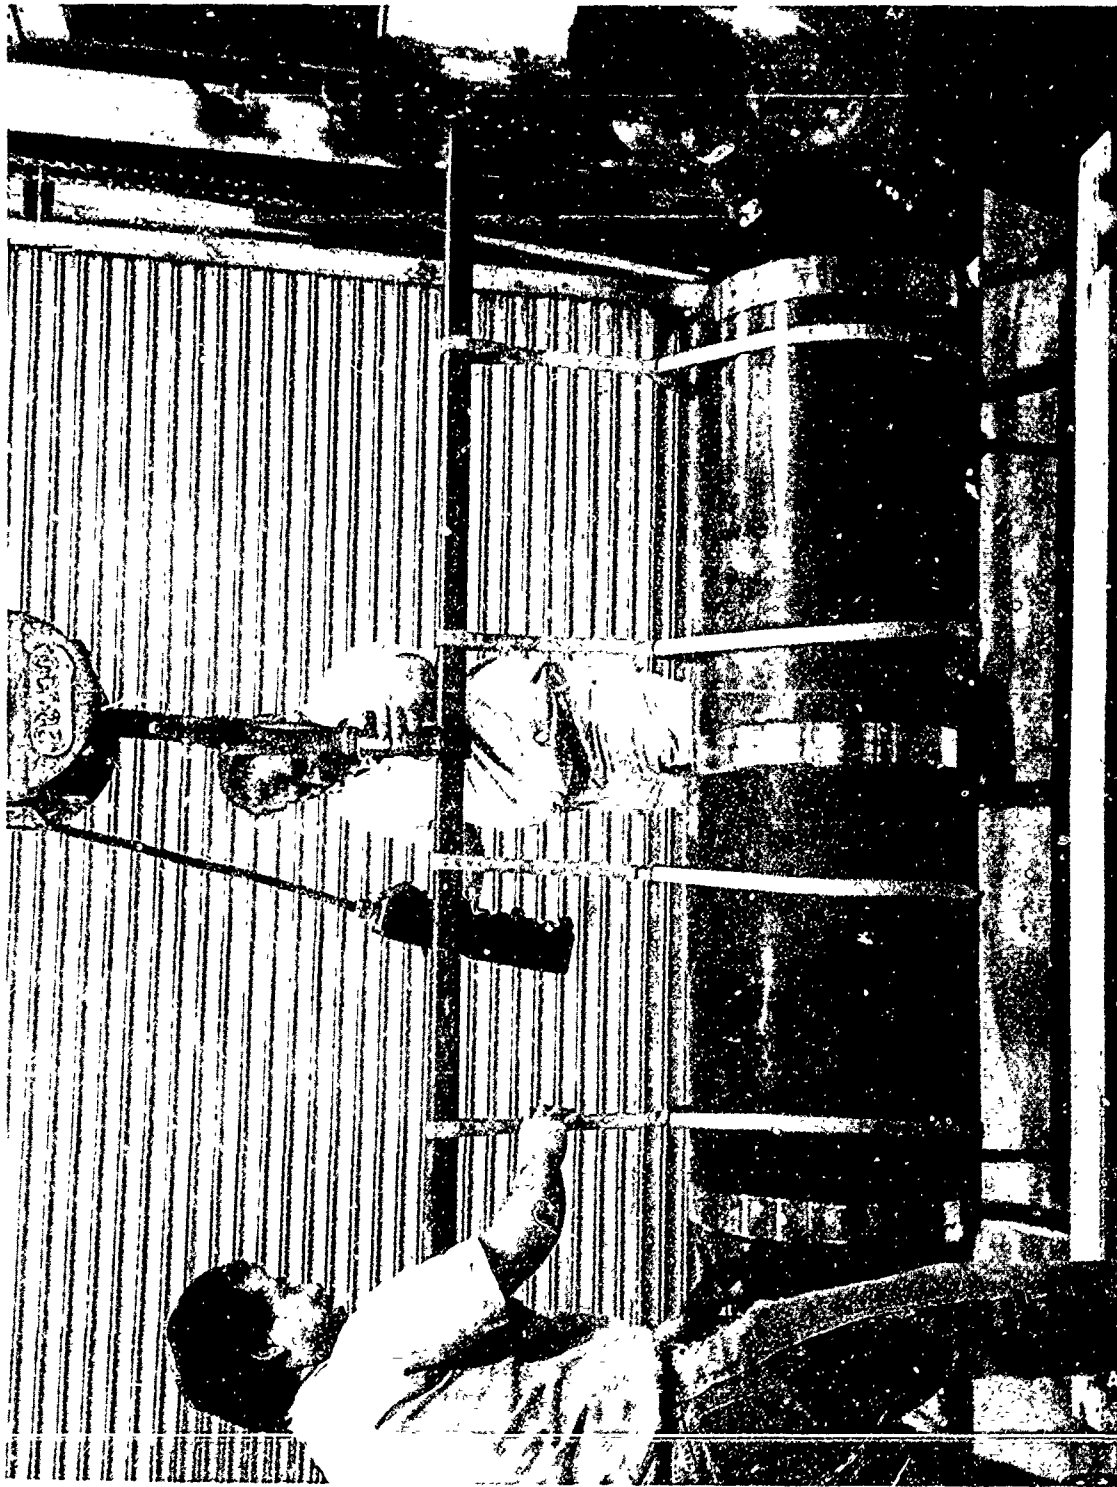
Lifting of the long housing test assembly from the roller conveyor and placing it into the lower half of the cage fixture.
